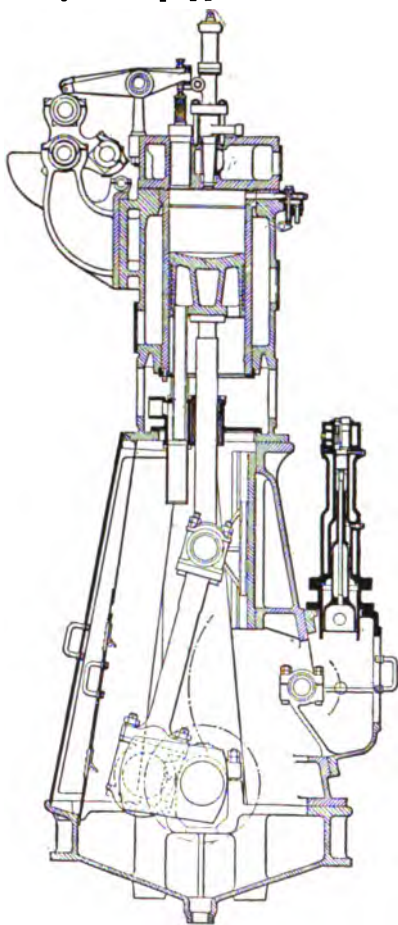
Cross-section of Werkspoor Diesel on the motor-ship "Vulcanus."
